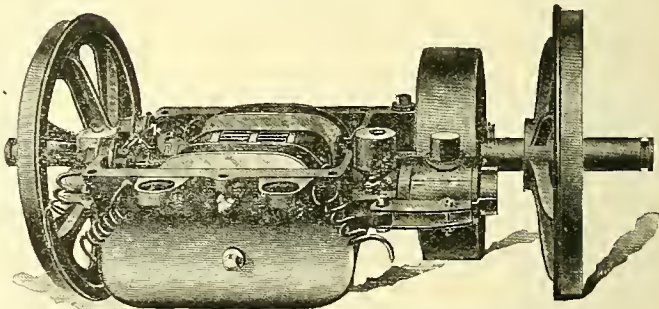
MOTOR ATTACHED TO A PAIR OF WHEELS.
